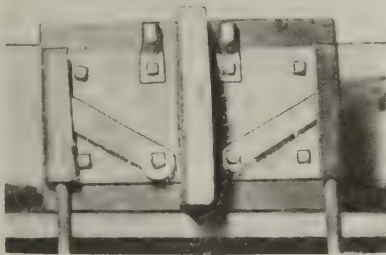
MINING MACHINE CABLE ATTACHMENT
